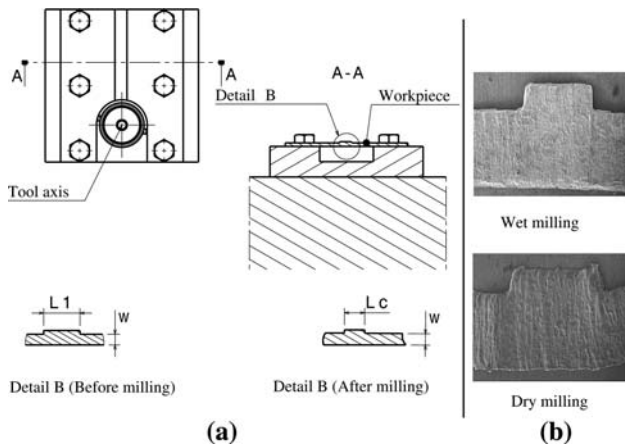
Method for measurement of the chip compression ratio C_h : (a) L_1 is the initial chip length ($C_h = L_1/L_c$) and (b) Two samples of collected chips for different cutting conditions
